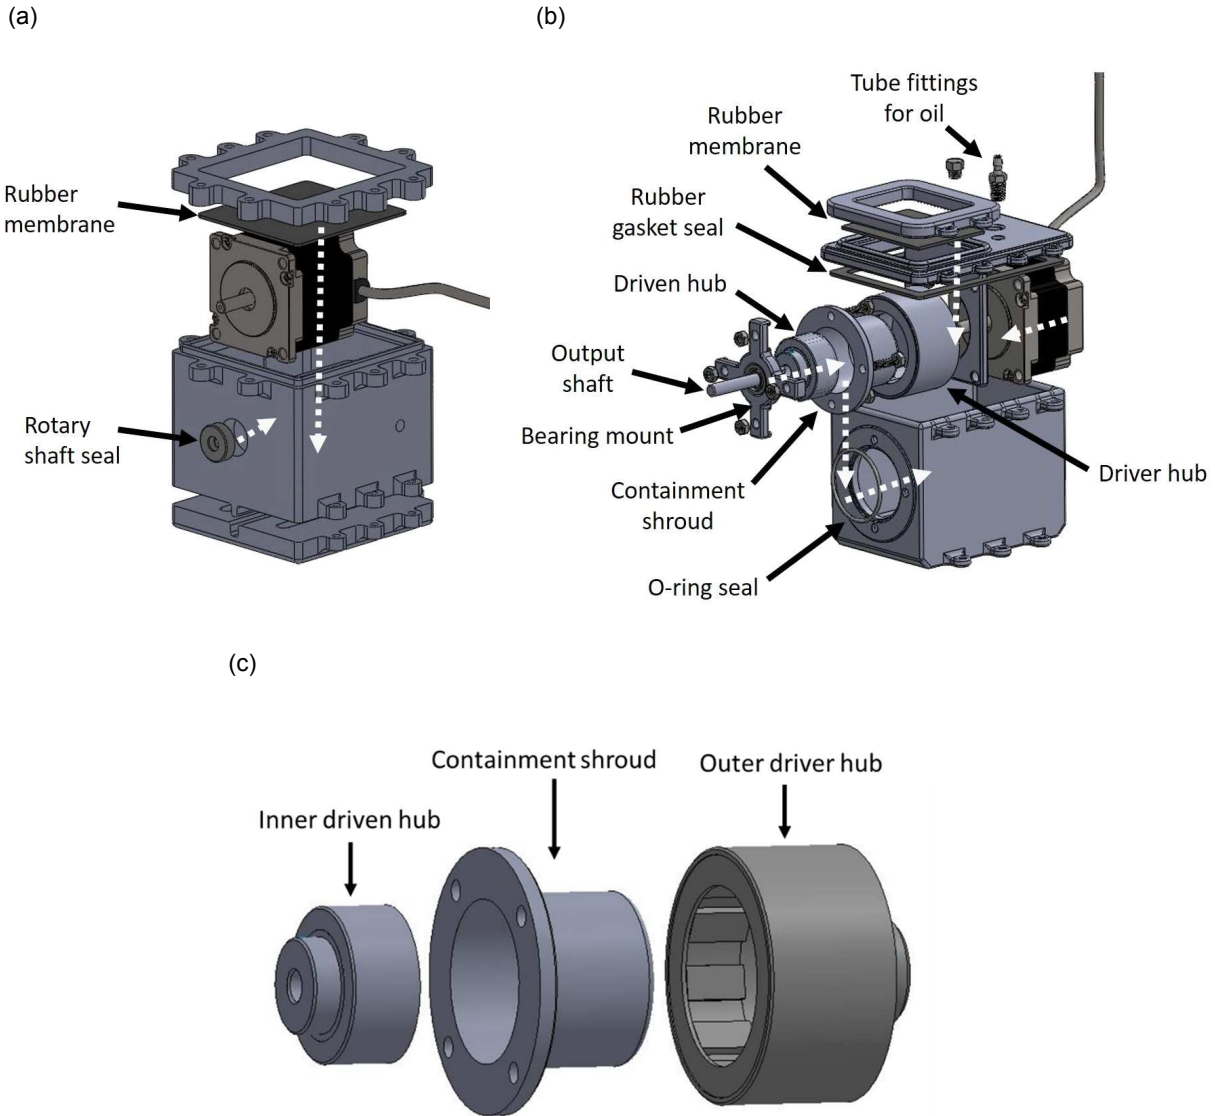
Motor housing design components. (a) Initial design of motor housing with rotary shaft seal and a flexible membrane for pressure equalization. (b) Final design of motor housing with magnetic shaft coupling to create a more sealed enclosure from seawater environment. (c) The magnetic co-axial shaft coupling is composed of three parts: 1) an inner driven hub with magnets placed along the outer cylinder, 2) a non-magnetic containment shroud, and 3) an outer driver hub with magnets placed along the inner side.
